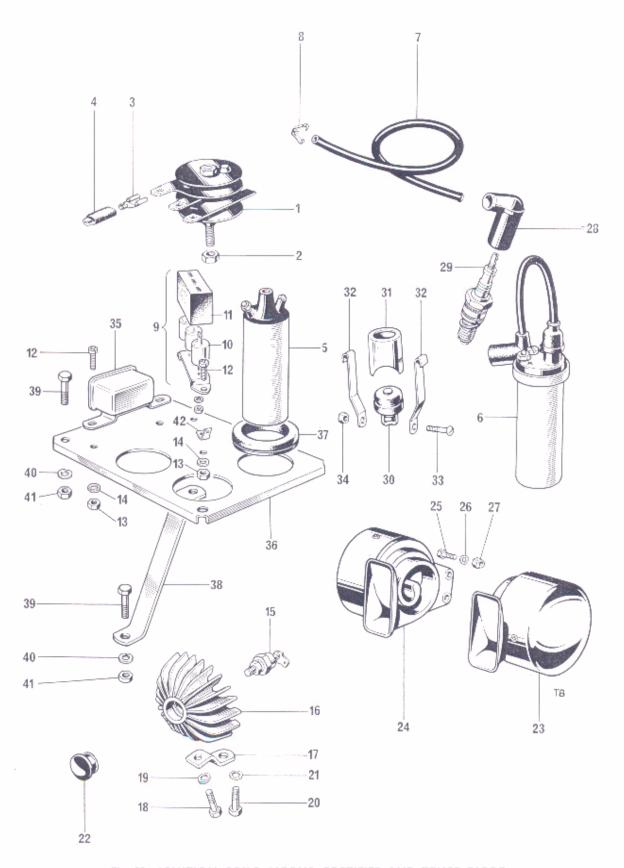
IGNITION COILS, HORNS, RECTIFIER AND ZENER DIODE
